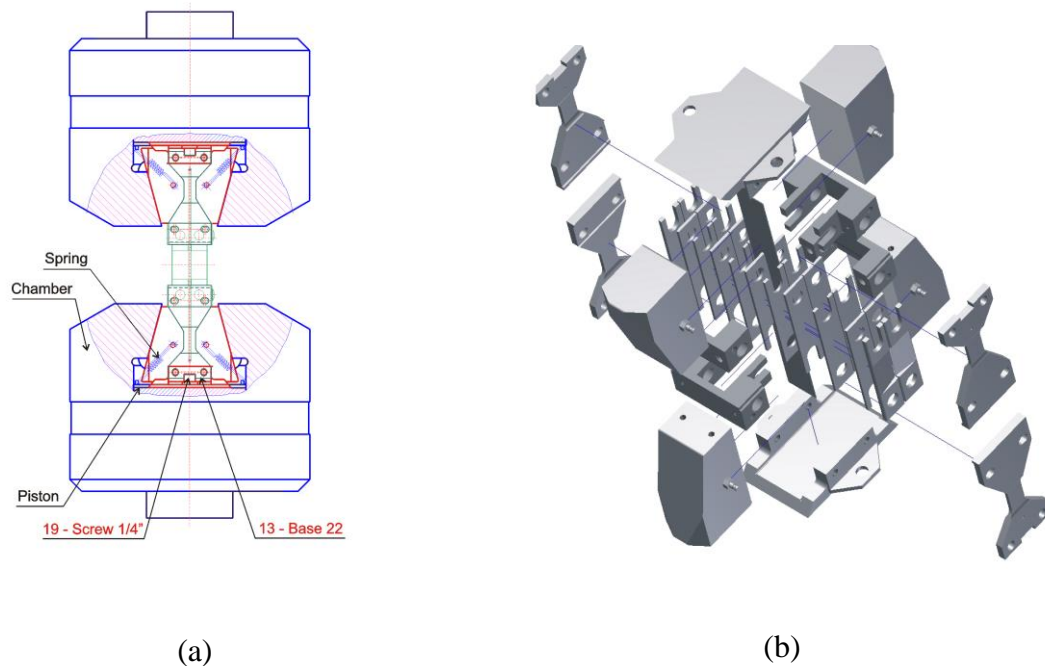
Scheme of the fixture: (a) general view of the fixture mounted in the testing machine grips; (b) exploded view
